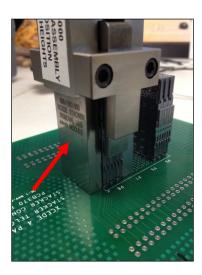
Photo shows extension blocks being used on either side of a single Stacker module.
